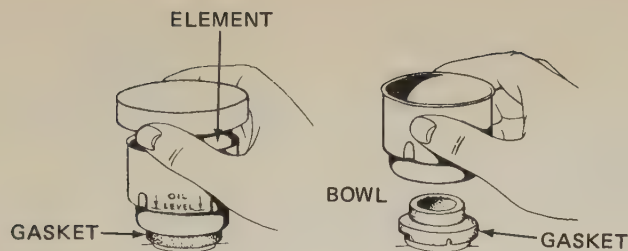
Removing oil-bath air cleaner for cleaning and replacement of the oil. (Briggs & Stratton Corporation)
